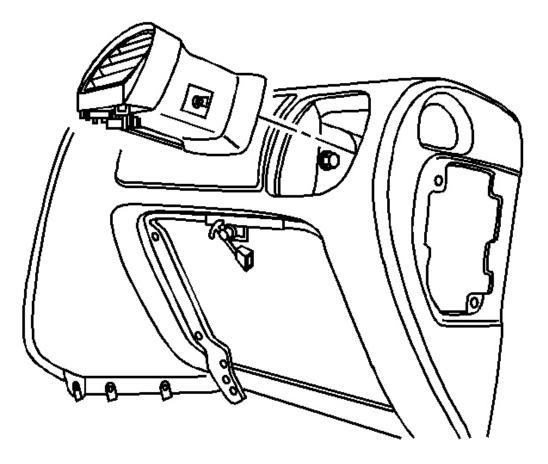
View Of Air Duct Extension Courtesy of GENERAL MOTORS CORP.
